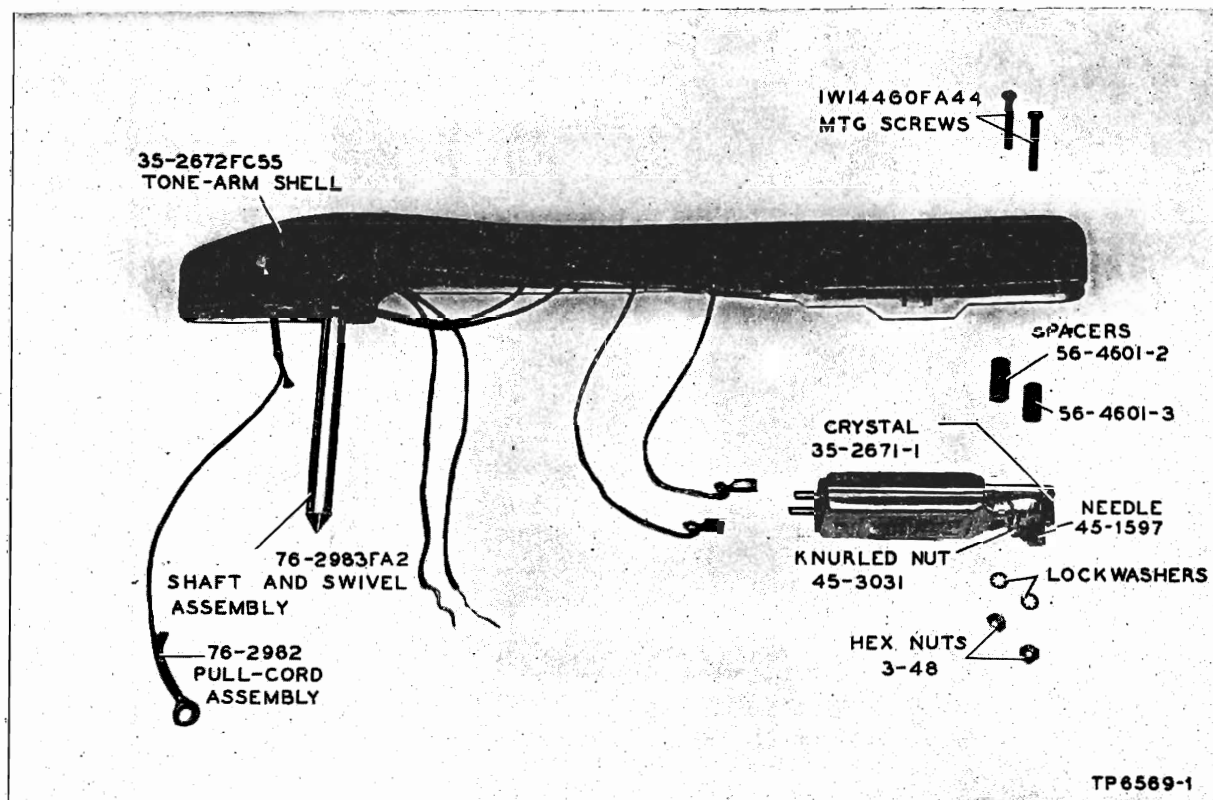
Record-Changer Tone-Arm Assembly, Part No. 35-2663-2
